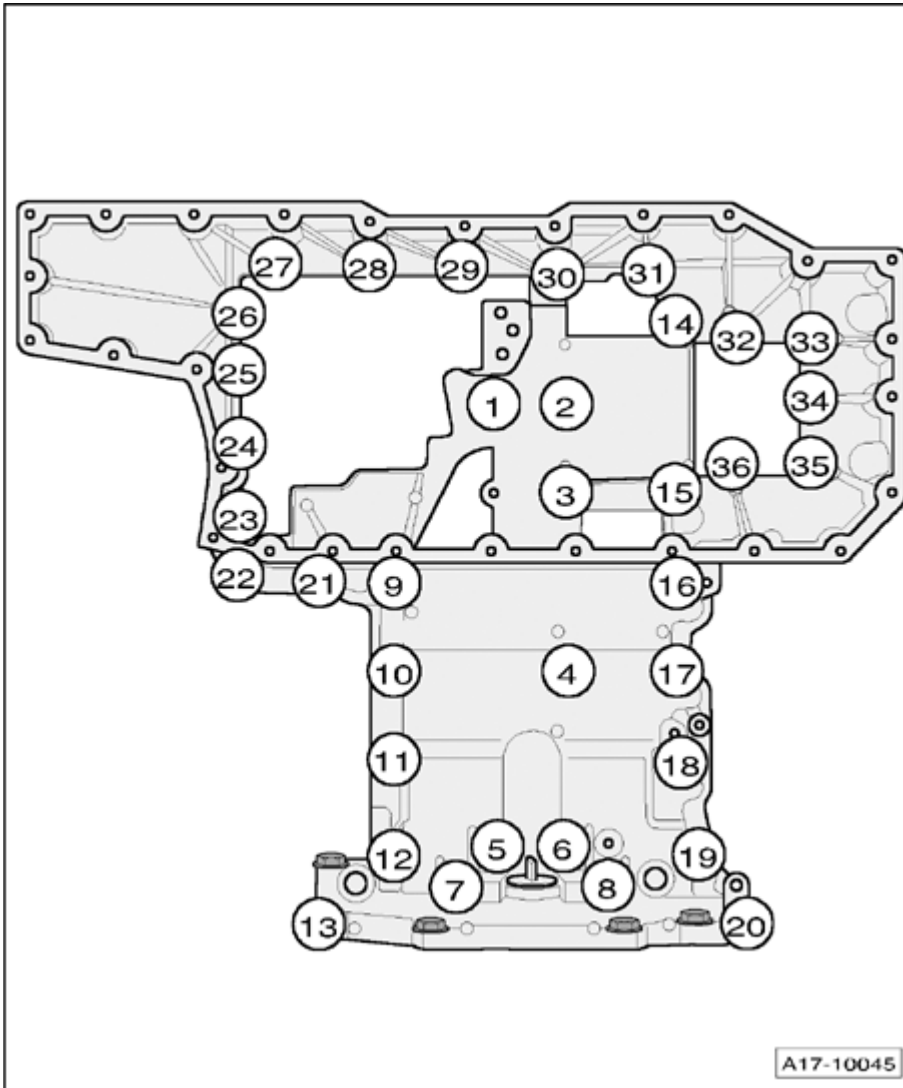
Oil Pan Upper Section Bolts Tightening Sequence
